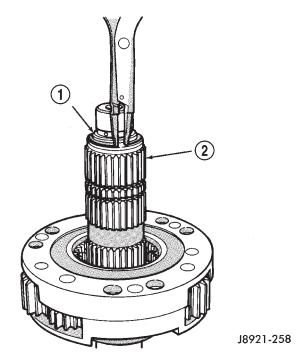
Intermediate Clutch Shaft Snap-Ring Removal
